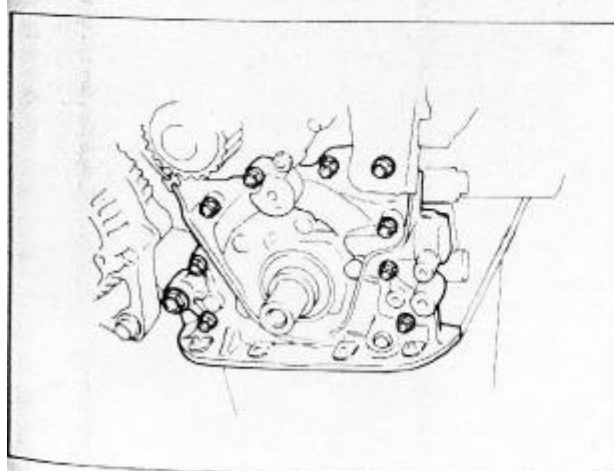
A — 33 REMOVAL BOLTS FOR OIL PUMP
